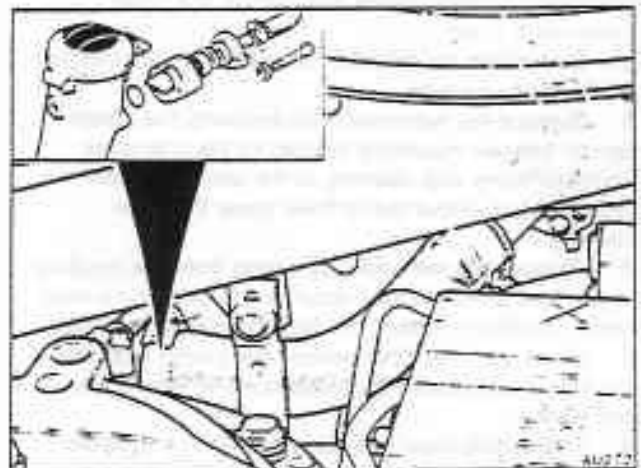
Crankcase breather (Solex 4 A 1 carburettors other than Mulsanne Turbo)
